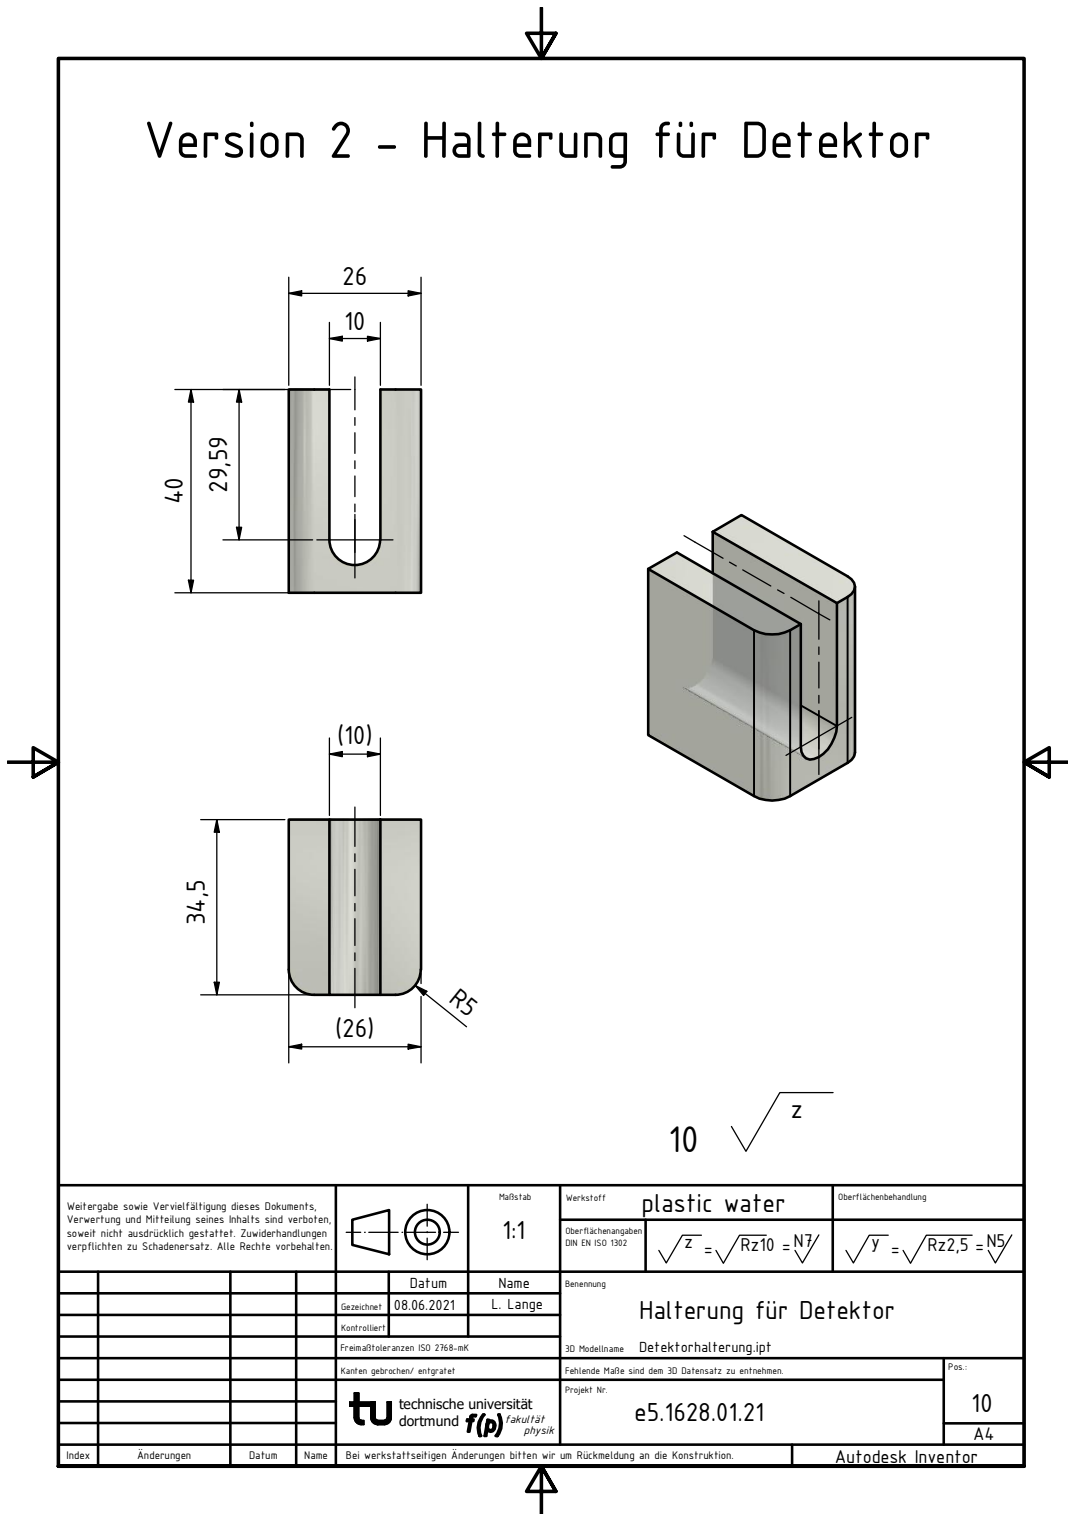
Construction Drawing: bracket for the soft X-ray chamber.
